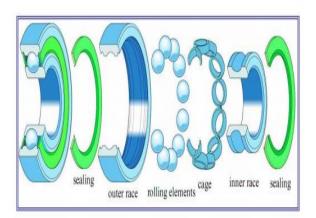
Exploded view of bearing assembly Load transmission between bearing surfaces in relative motion can be made easier in effective manner by interposing rolling elements between surfaces though the arrangement results in high stresses in the restricted regions of load transmission.
